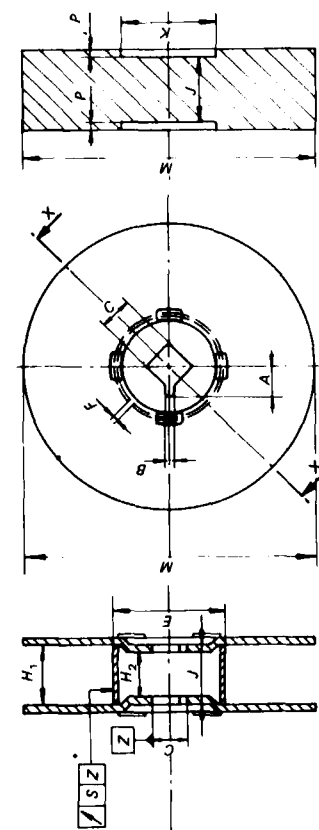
Flange No. 1 (That which first engages the camera spindle)
